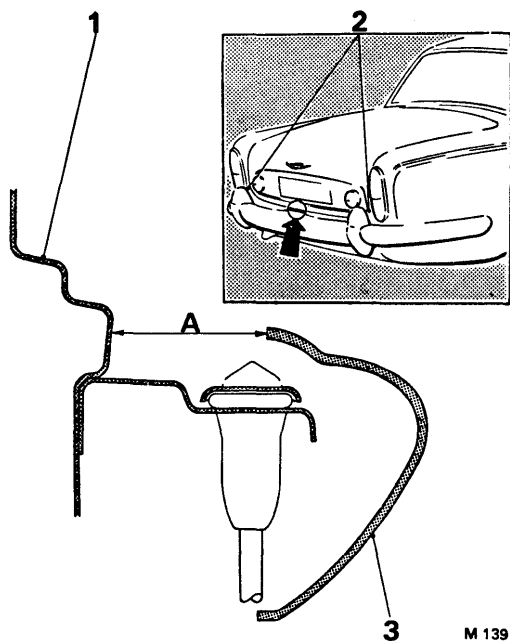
REAR BUMPER TO BODY CLEARANCES (4-Door Saloon Illustrated)
